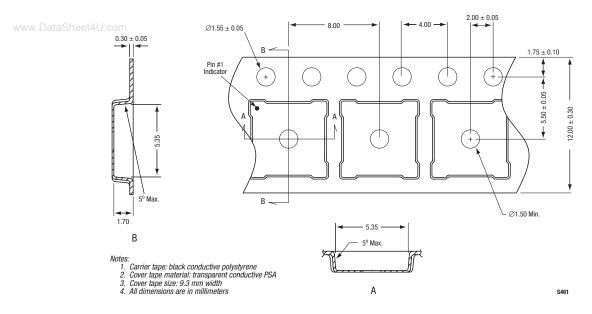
SKY73012 32-Pin RFLGA Tape and Reel Dimensions
